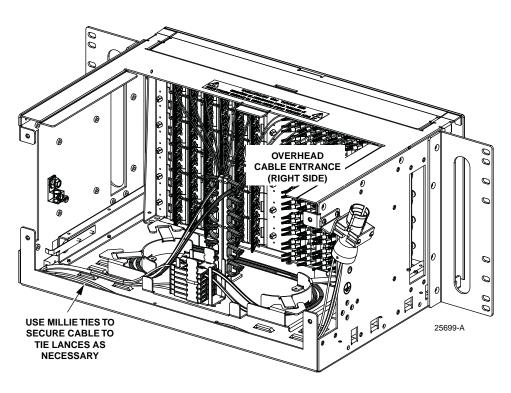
Overhead, Right Side Terminated Cable Entrance (5RU Panel Rear View)
